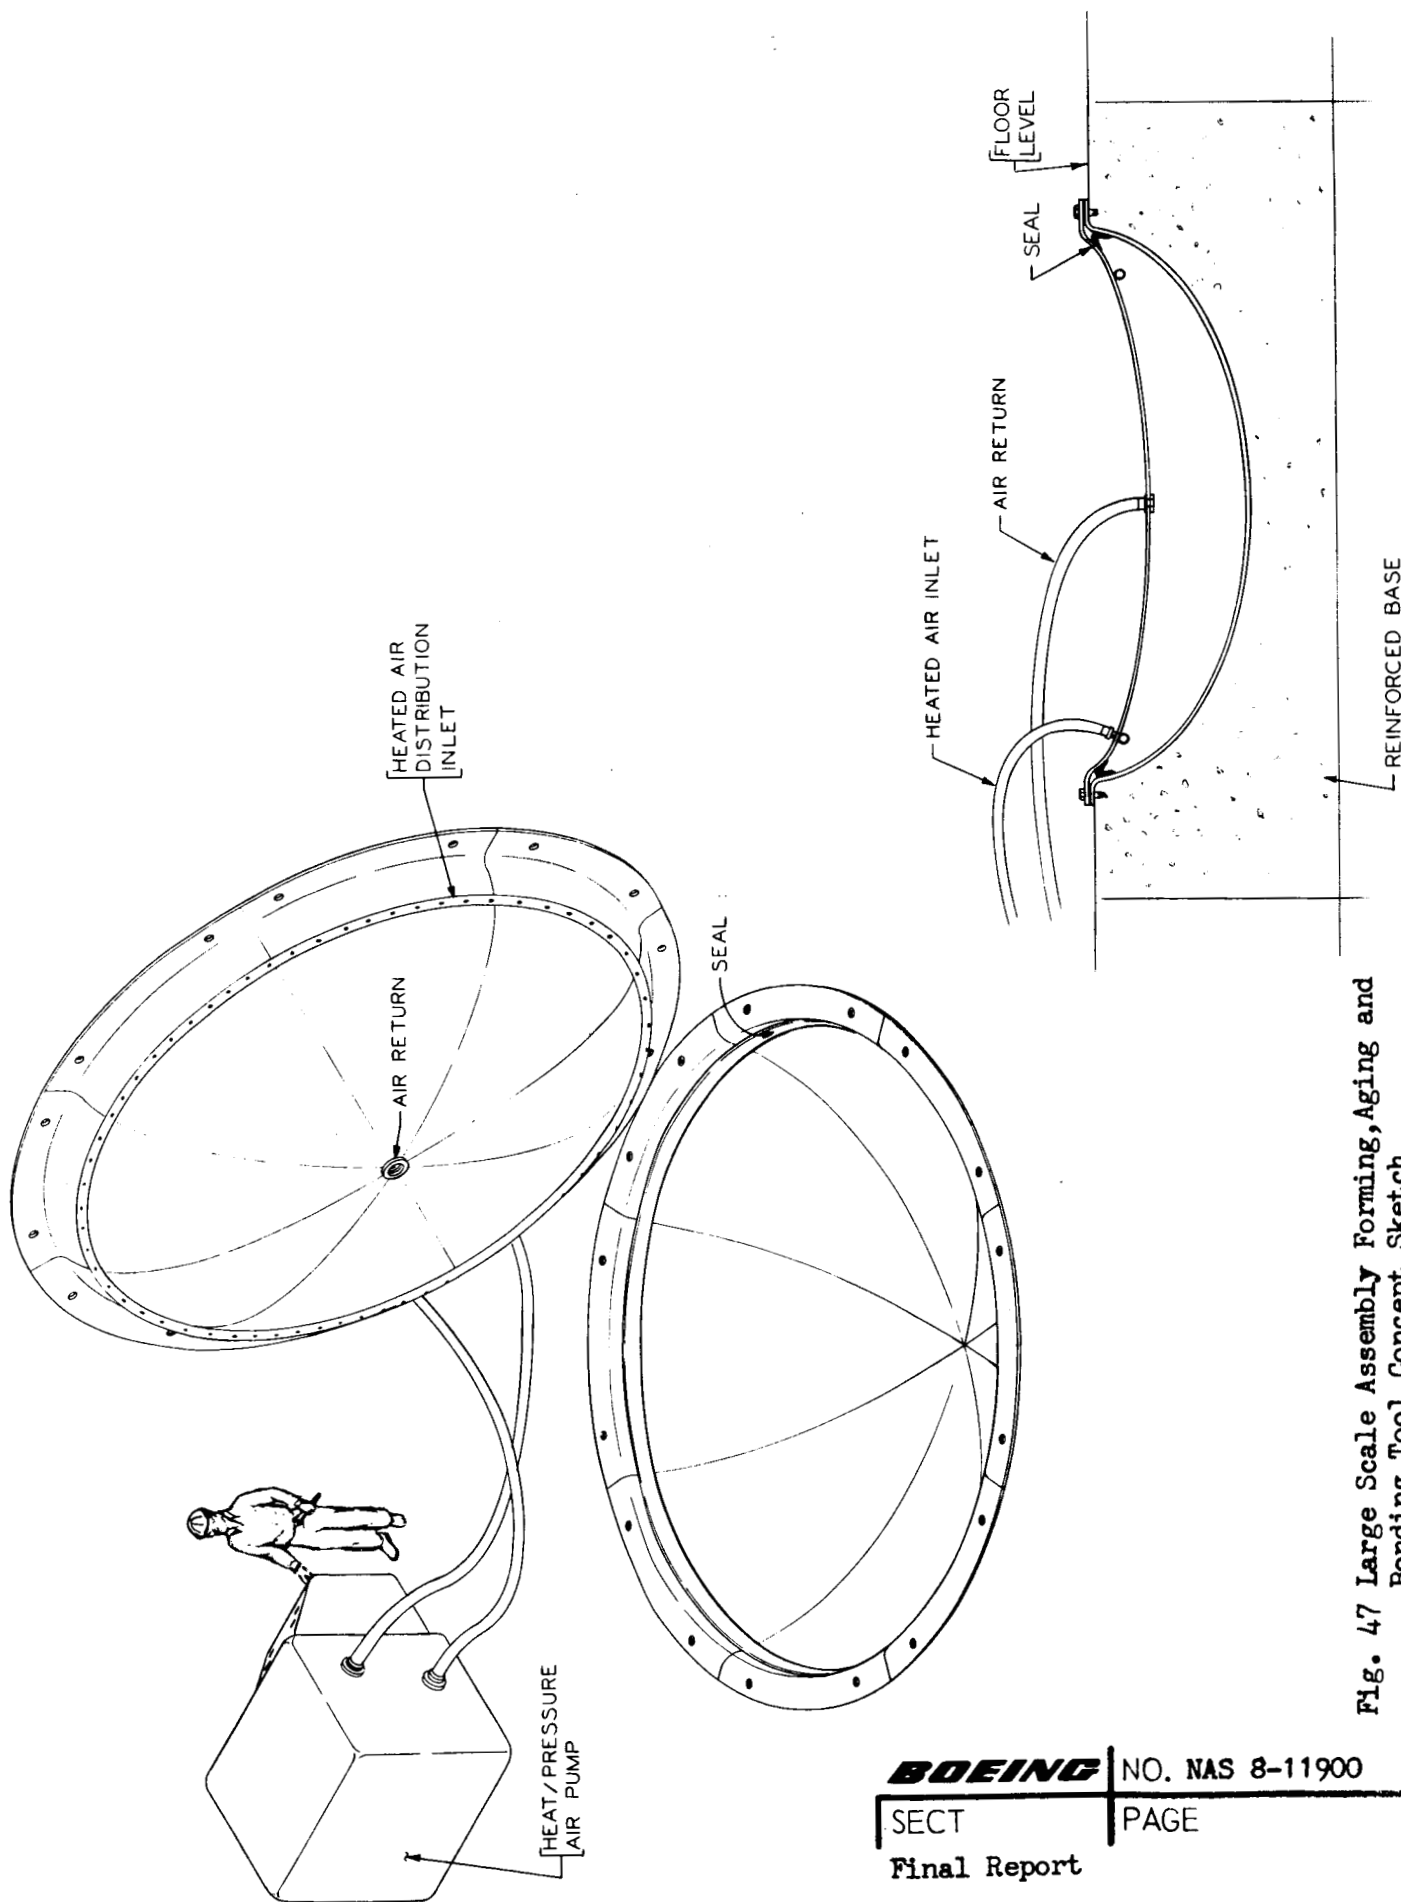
Large Scale Assembly Forming, Aging and Bonding Tool Concept Sketch
